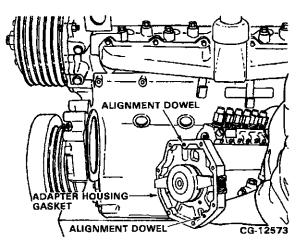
Install Injection Pump and Adapter Housing Assembly to the Front Plate
